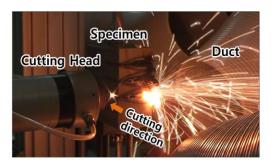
View of the laser cutting experiment. The cutting started from the side of the specimen and proceeded with the cutting head moving from the right to the left.
